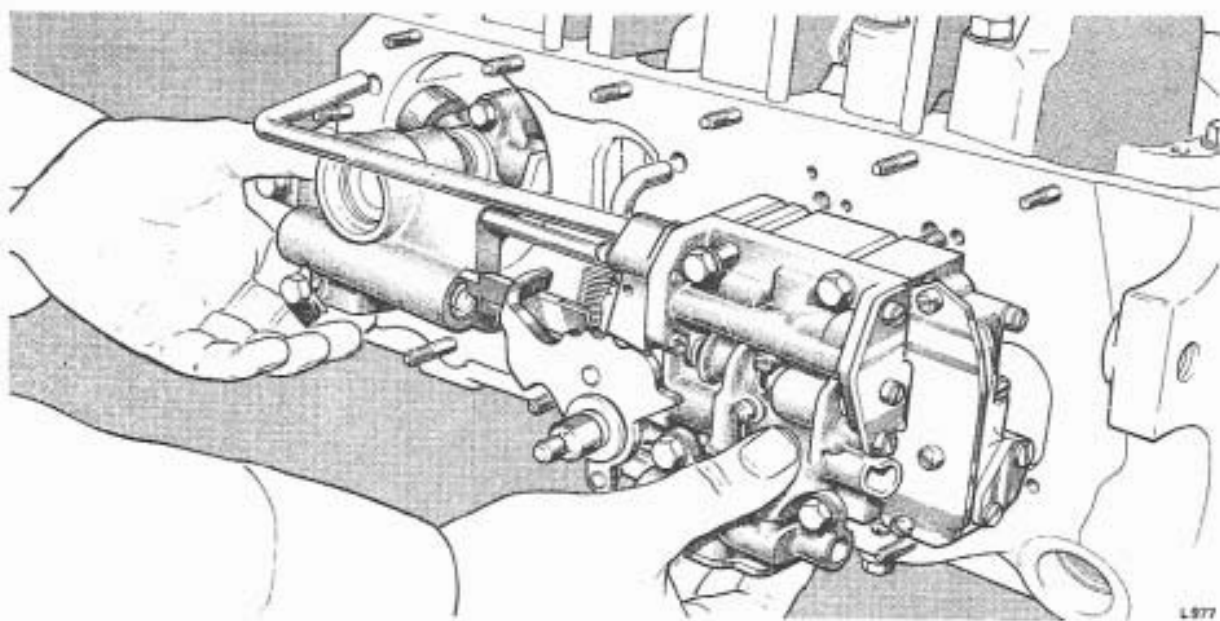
REMOVING THE CONTROL VALVE UNIT
